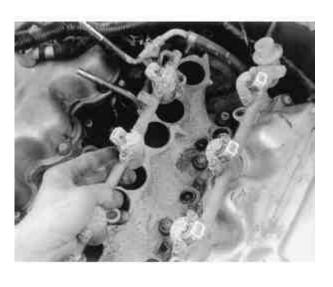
In order to remove the injectors, loosen and remove the cover retainers
